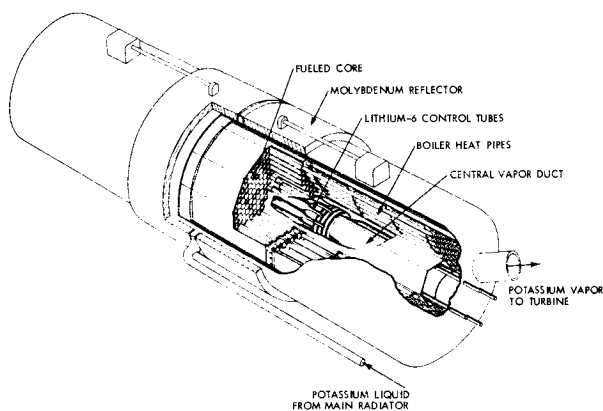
Reactor Model - Double Ended Heatpipe, Integral Boiler Type
